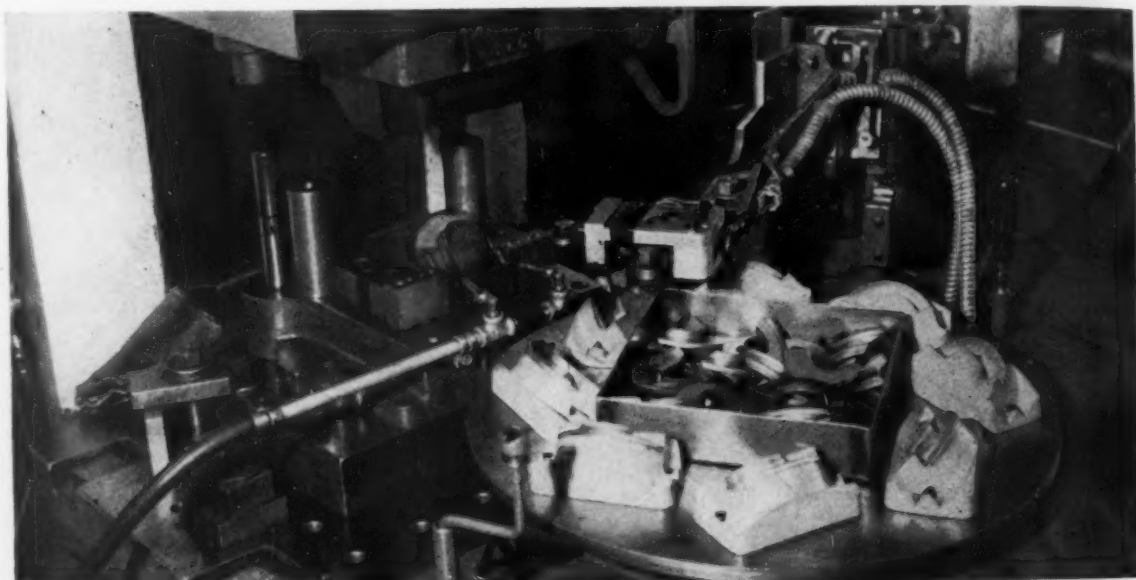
Plastic blocks on indexing dial have a recess to position stampings. Transfer arm is in
